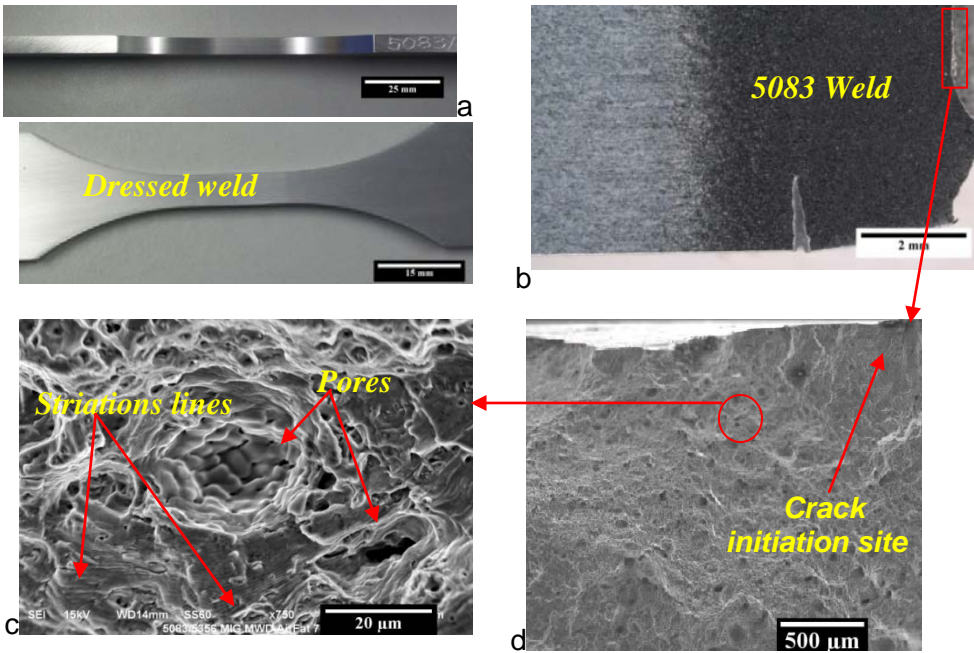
Fatigue fracture of Al5083/ER5356, a) dressed weld, b) fracture in the WM, c) pores on crack propagation area and d) crack initiation site
